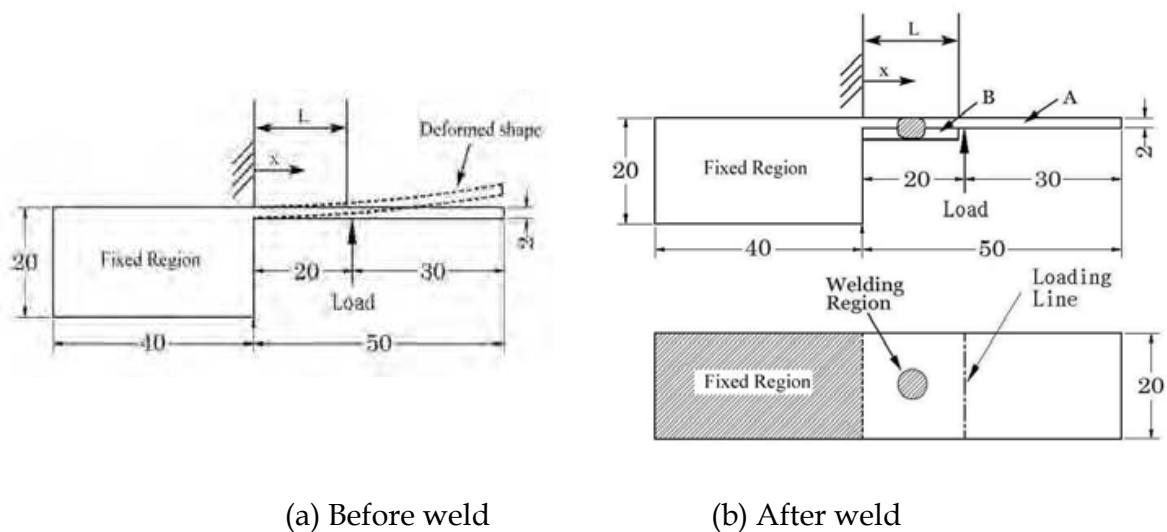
Dimensions of the specimen used for measurement of out-of-plane displacement. (a) Normal canti-levered plate, (b) Spot welded canti-levered plate.
